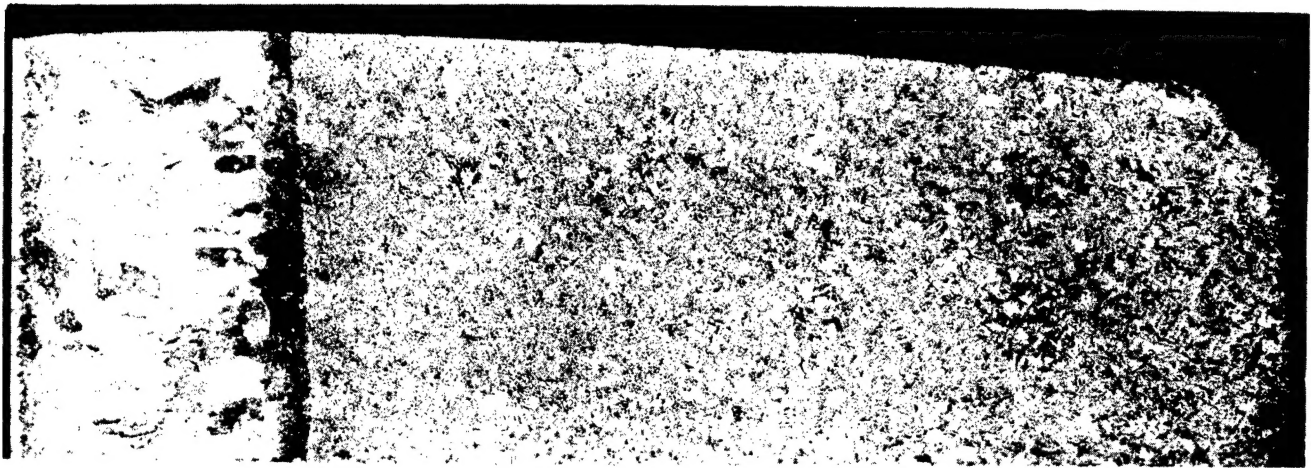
ELECTRON BEAM WELDED NOTCHED TENSILE SPECIMEN
